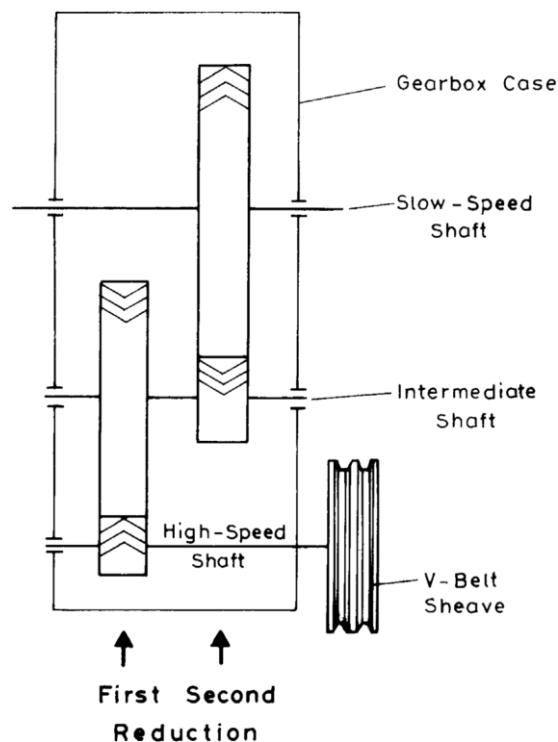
Schematic drawing of a double-reduction gear reducer [2, p. 227]
